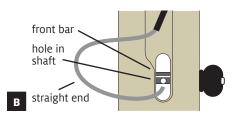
INSTALL SCOTCH TENSION SPRING AND STRING
